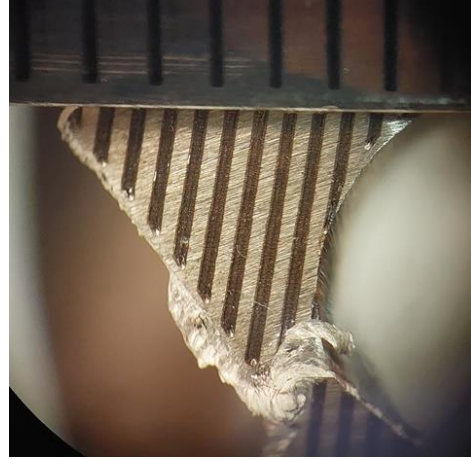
An example of a drill bit after creating micro-grooves on the flank face, after machining
